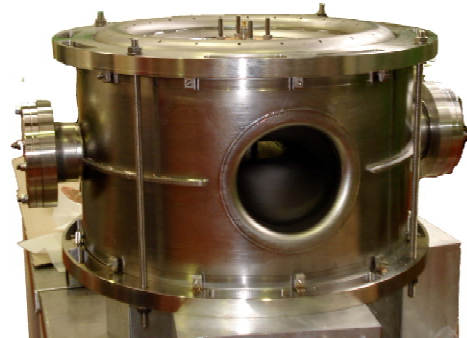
SSR1-001 in the “squirrel cage” that clamped the end walls to the outer shell during pre-weld tuning.
